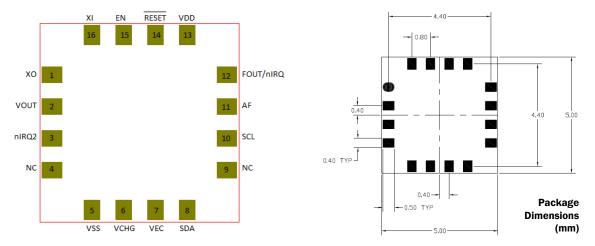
CBC34803 Package (left: top view, looking through package; right: pad dimensions)
